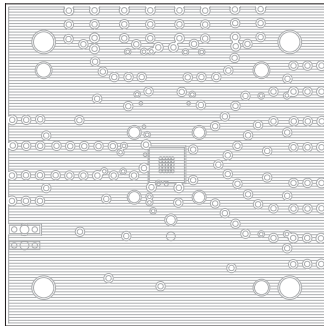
SKY73070 Evaluation Board Assembly Diagram
